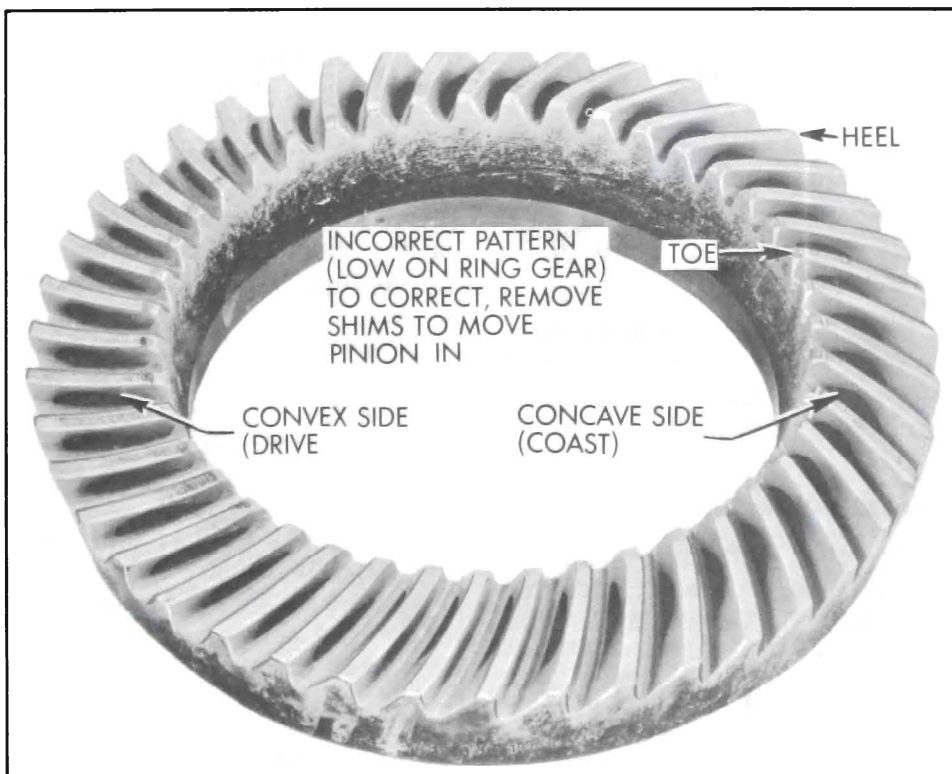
Ring Gear—Incorrect (low) Tooth Contact
